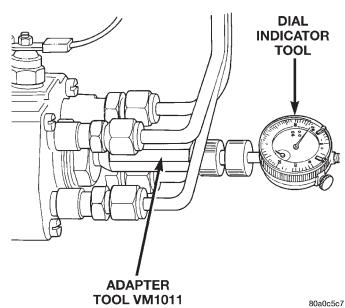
Installing Dial Indicator and Special Adapter Tools
